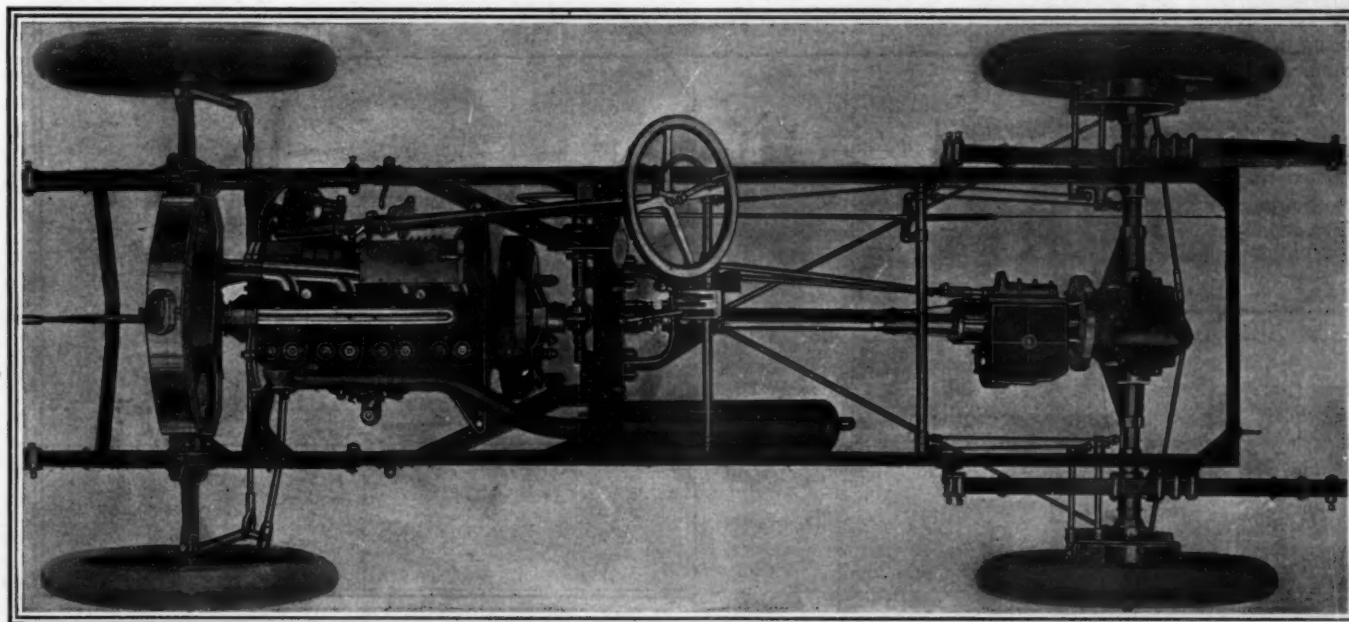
This is the chassis on Overland Model 59, which uses the motor shown in Fig. 3. This motor has cylinders cast separately and cooled by thermo-siphon means. The new design of radiator is fitted on this chassis and is carried on trunnion supports. The gearset is a unit with the rear axle and but a single universal joint is made use of in this chassis. The propeller shaft is carried inside of the torsion tube
